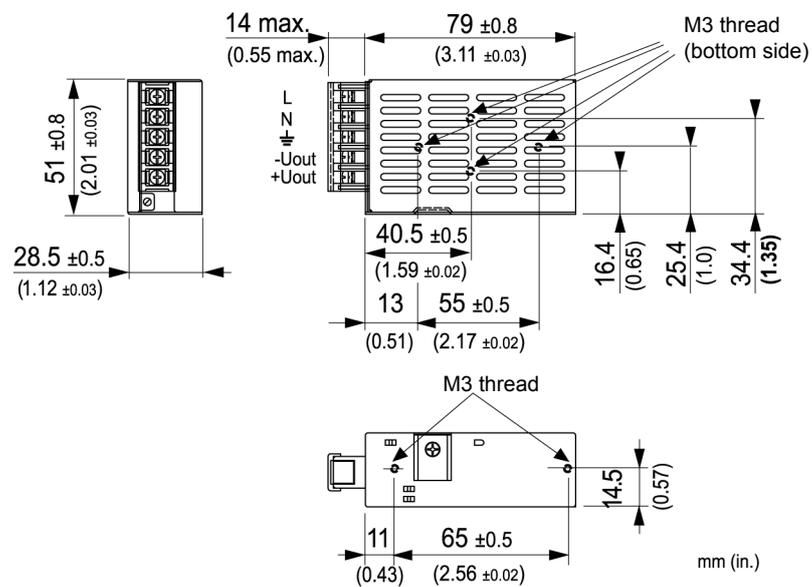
Dimensions and picture of Industrial Power Supply XXX2CDCPSS
